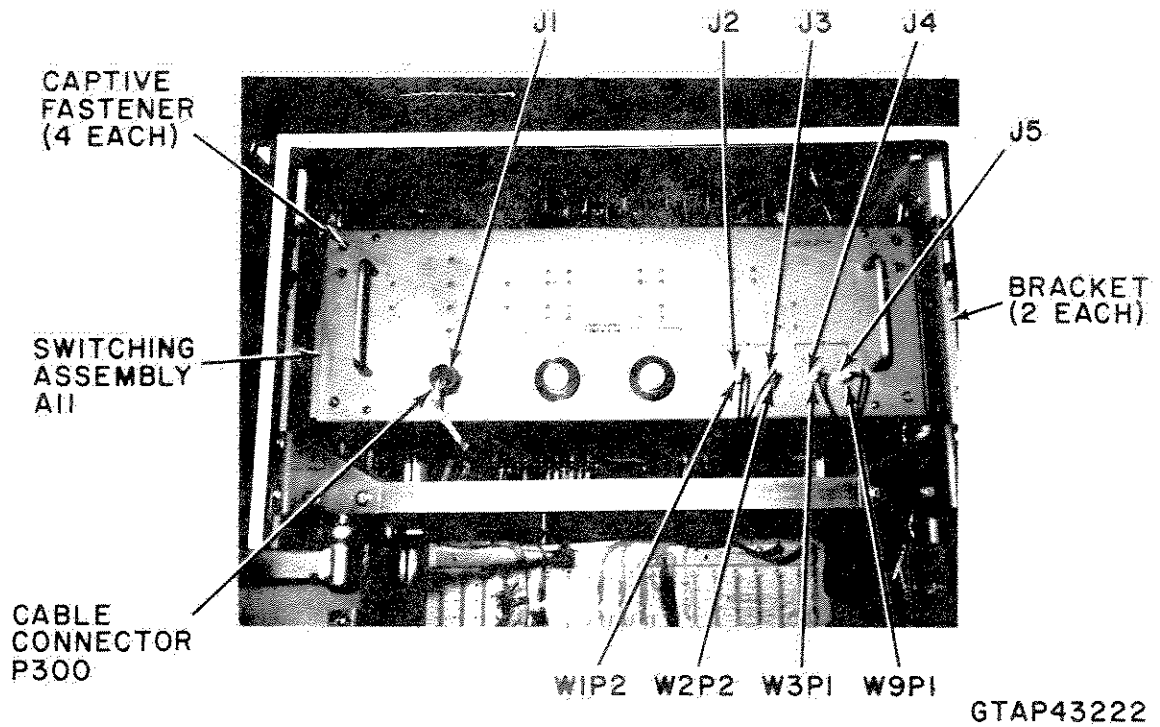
Transmit Beamformer Cabinet, Unit 150, Switching Assembly A11
